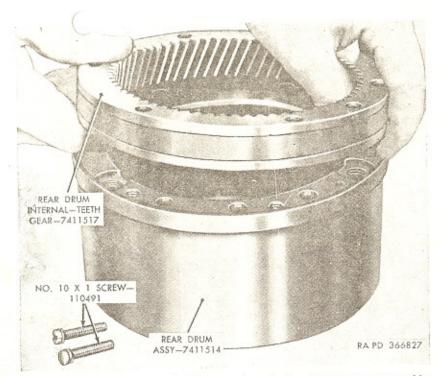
Removing or installing rear drum internal-teeth gear assembly.
